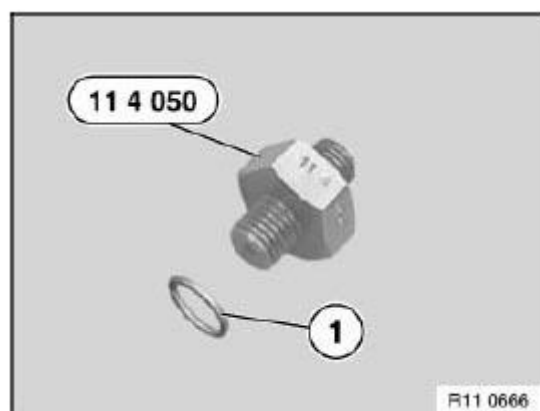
Identifying Sealing Ring And Special Tool (11 4 050)
